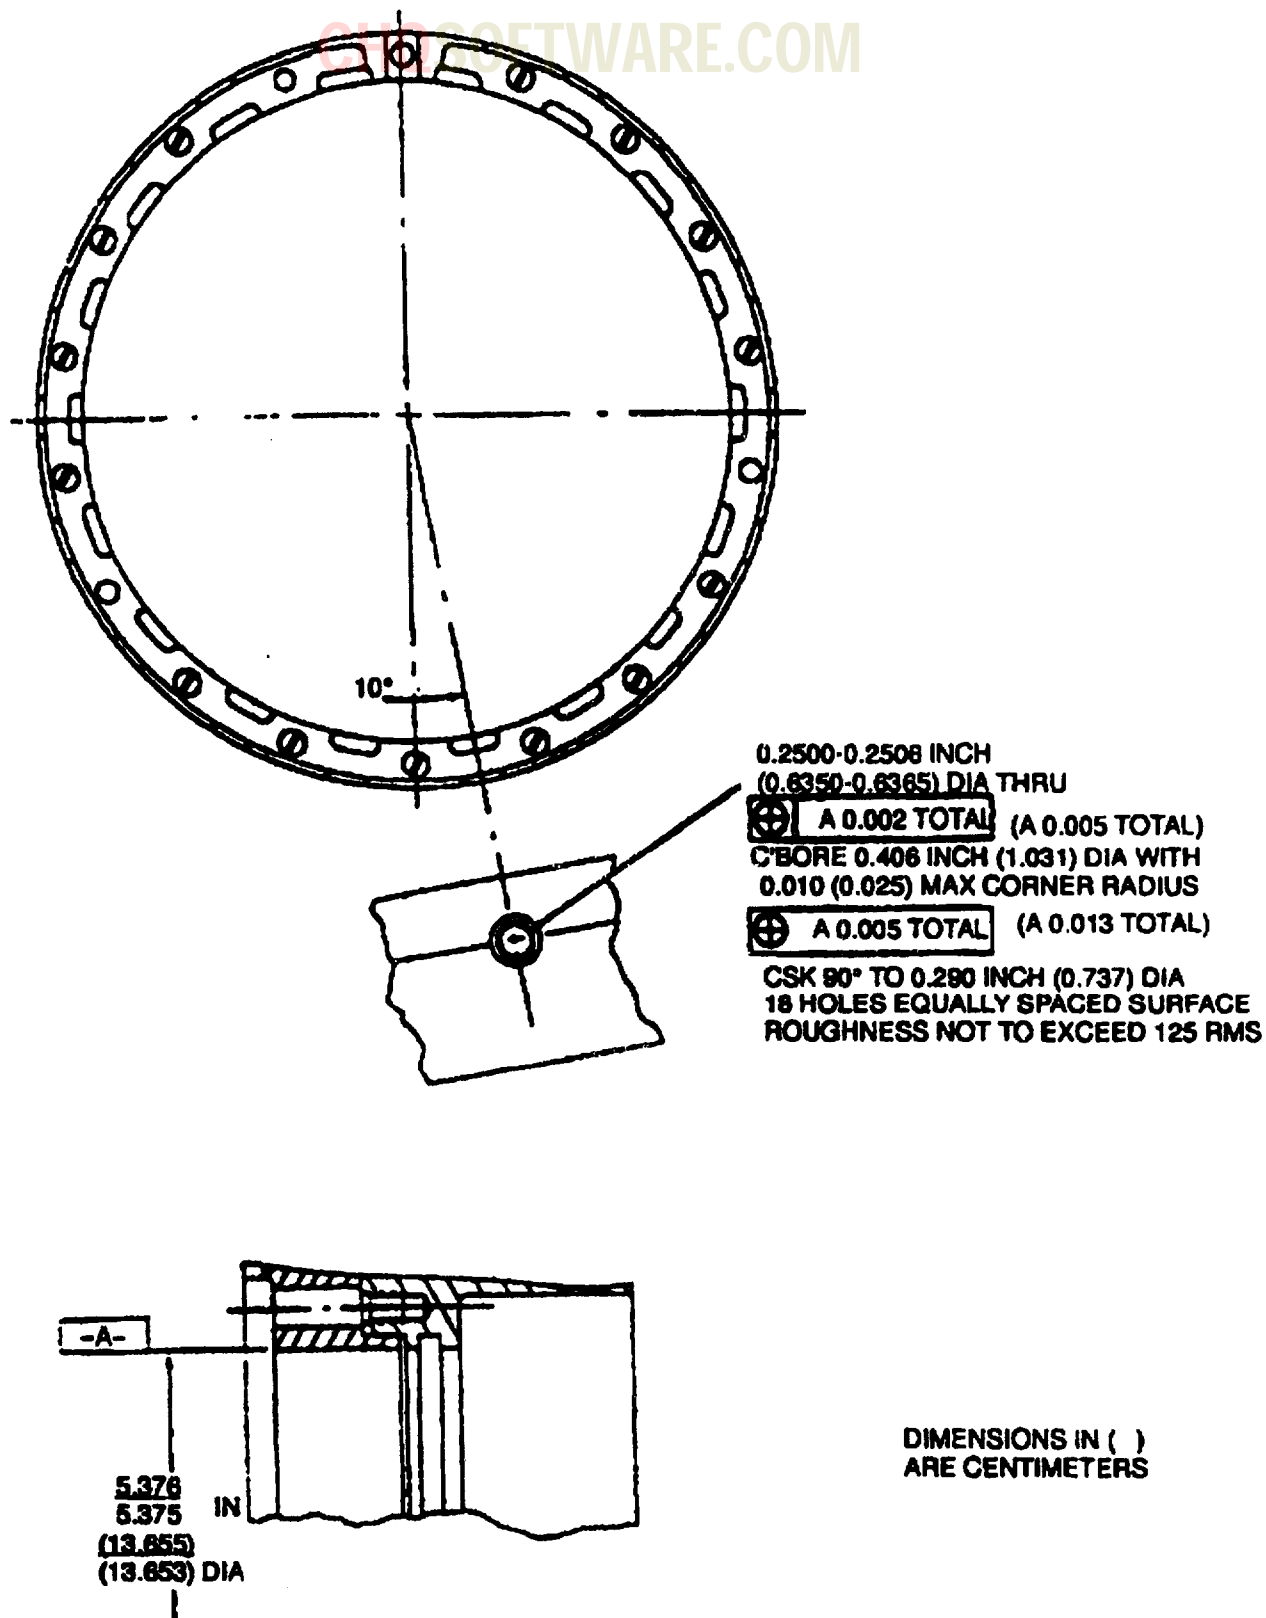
Final Drilling and Machining of Inner Rear and Forward Fairings.
